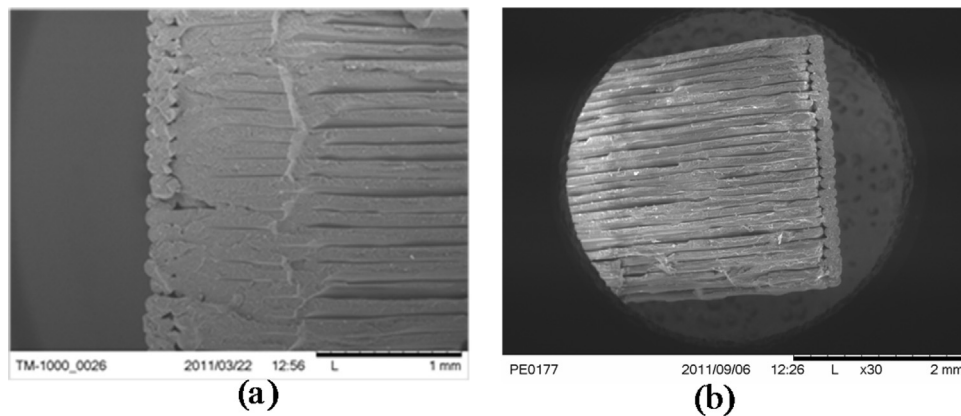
Fracture surface of horizontal build 90° orientation specimen (H3): (a) left edge, broken hinge, (b) right edge, intact hinges.
